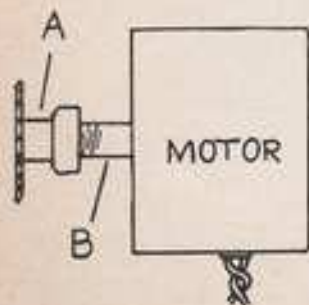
A 14-tooth sprocket wheel (A) is soldered to the cap at the end of the shaft (B) from the motor.
